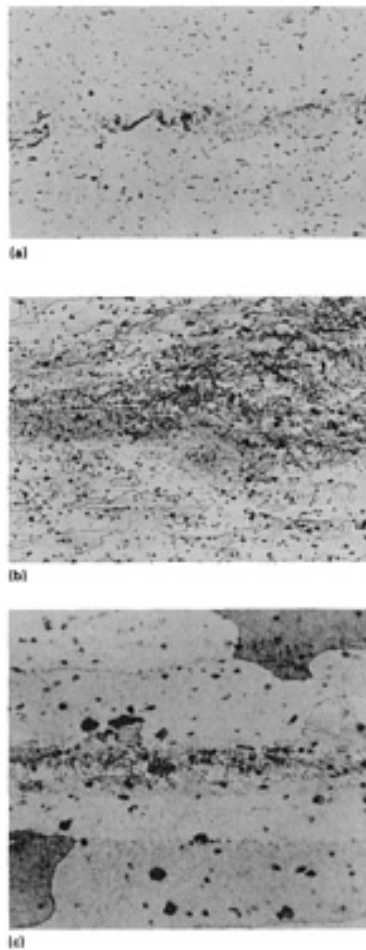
PHOTOMICROGRAPHS OF WELD INTERFACE CROSS SECTIONS OF SELECTED ULTRASONICALLY WELDED ALUMINUM ALLOYS. (A) TWO PIECES OF 0.30 MM (0.012 IN.) THICK 1100 H14 ALLOY. 500 \times . (B) TWO PIECES OF 0.81 MM (0.032 IN.) THICK 2024-T3 BARE ALUMINUM ALLOY. 150 \times . (C) TWO PIECES OF 1.02 MM (0.040 IN.) THICK 2020 ALLOY. 750 \times
